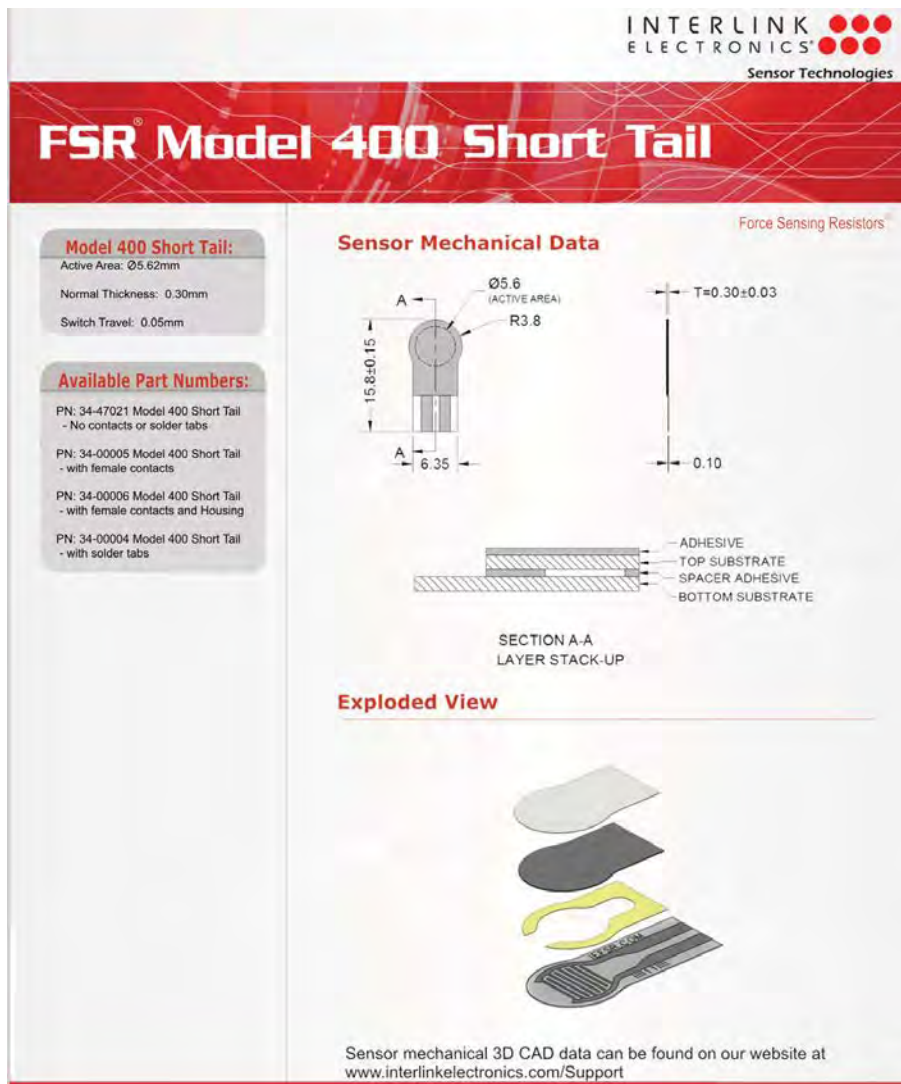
Technical specification and exploded view of the force sensing resistor.
